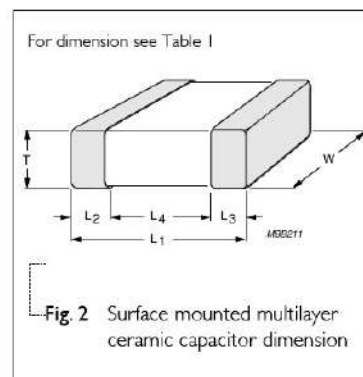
Surface mounted multilayer ceramic capacitor dimension
